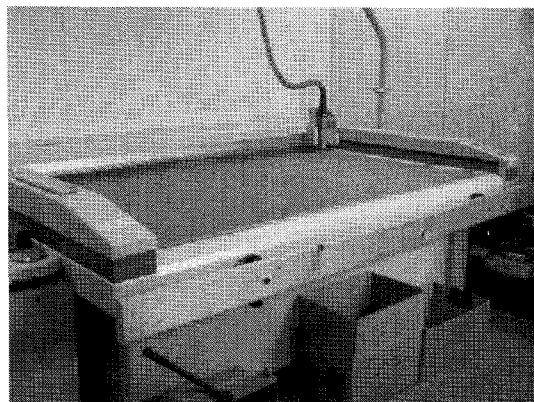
Sample maker, ZUND Cutter (L-1200 type).
